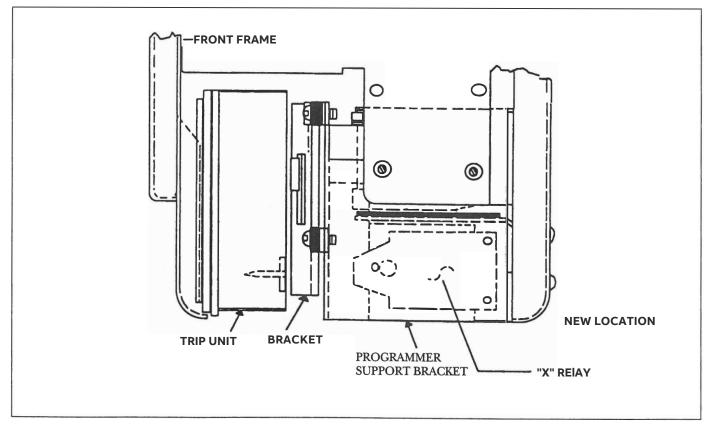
Right Side View Showing Mounting Position of Programmer Unit
